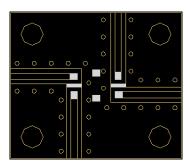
Applying the Solder Paste to the 8 Points on the PCB Surface
